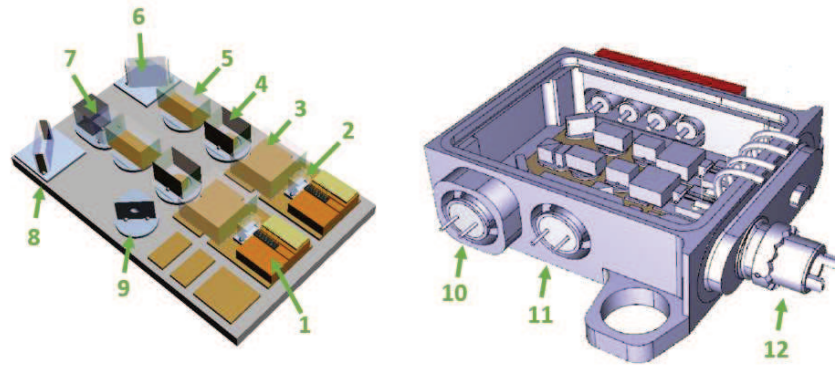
Left, design of assembled DPSSL by soldering means. The total amount of solder alloy used to assemble the Martian laser was 0.012 g of SAC305 and 0.006 g of Au80Sn20. The optical components (emitting laser diode and laser active medium crystals) which have heat dissipation factors were assembled over copper pads bonded on an aluminium base plate (orange pads under the components). Other optical components (lenses, mirrors, and crystals) were integrated onto KOVAR pads pre-assembled on an aluminium nitride (AlN) base plate for CTE mismatch reasons (grey pads under the components). Right, laser-housing design assembled by soldering technology. (1) Pumping diodes. (2) FAC. (3) Active crystal. (4) SHG. (5) Output laser cavity mirror. (6) Folding mirror. (7) Lambda half and polarization combiner cube. (8) folding mirror in front of (10) power feedback photodiode. (9) Pinhole-mirror in front of the autofocus photodiode (11). (12) Mini-AVIM output fiber connector bringing the light to the Martian sample.
